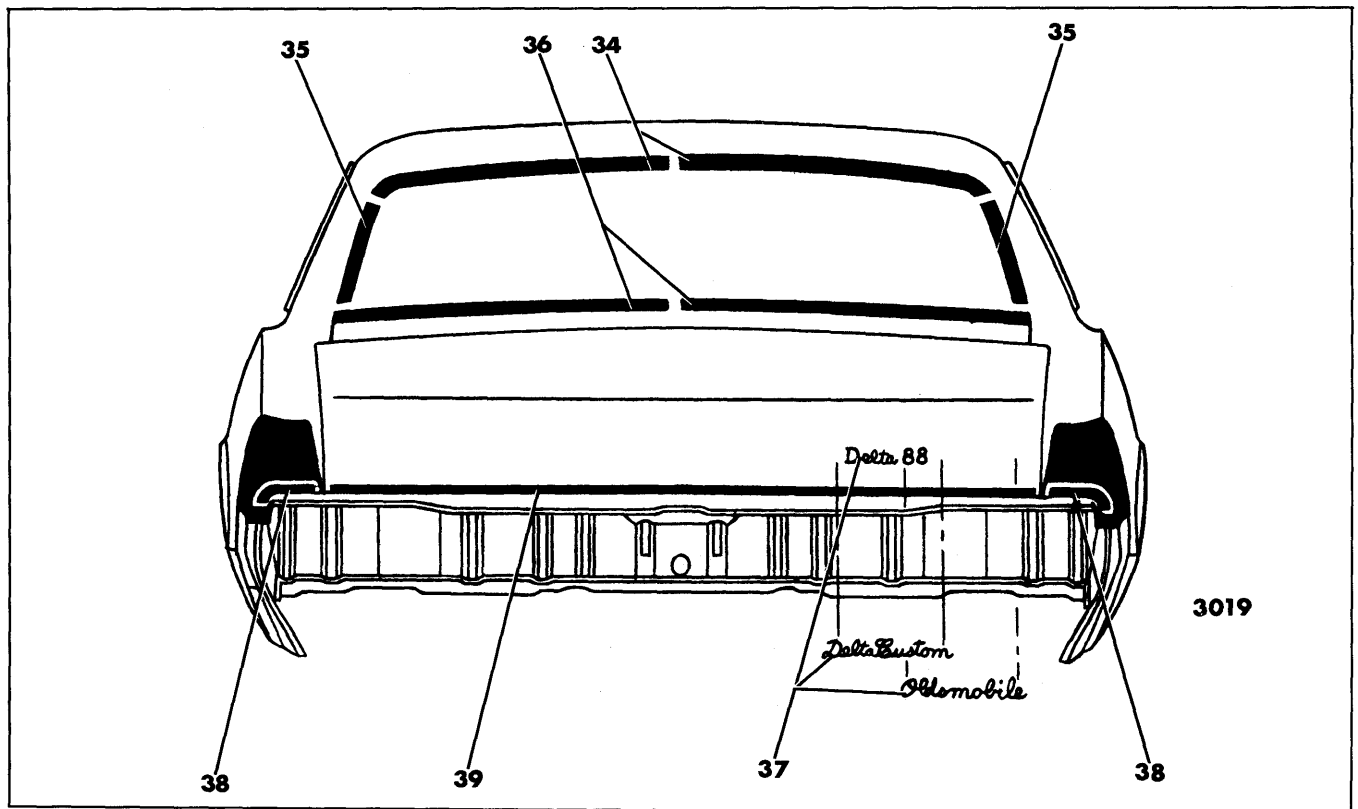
Oldsmobile 35600-36400-36600 Styles
